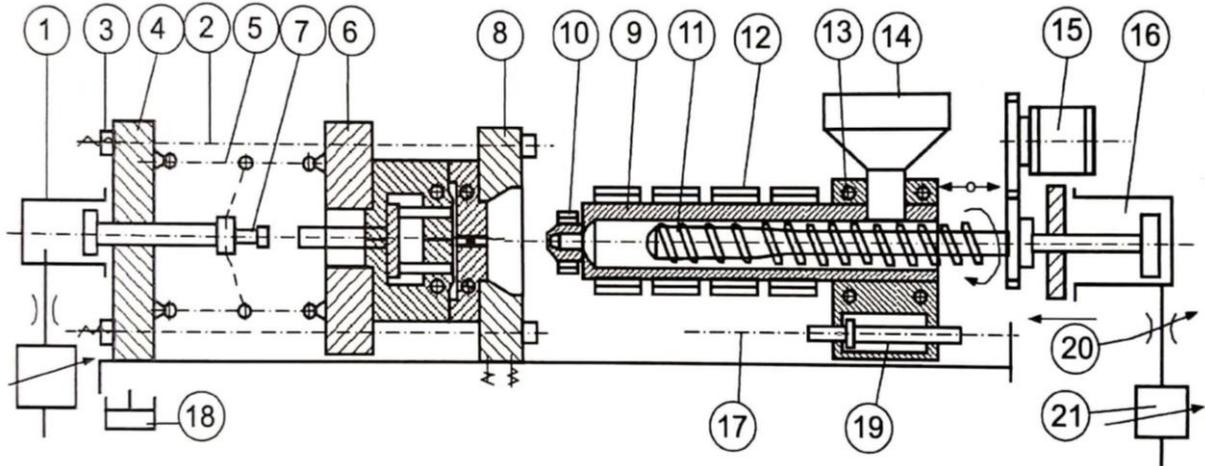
Schematic of a screw injection molding machine with basic components: 1 – drive cylinder for the table, 2 – guiding columns for the table, 3 – height adjustment nuts for the mold, 4 – rear fixed table, 5 – toggle lever system, 6 – moving table, 7 – injection machine buffer, 8 – front fixed table, 9 – injection cylinder, 10 – injection nozzle, 11 – screw, 12 – heaters, 13 – cooling system for the cylinder's feed zone, 14 – feed hopper, 15 – motor for screw rotation, 16 – screw shifting cylinder, 17 – guiding rails for the injection unit, 18 – hydraulic oil tank, 19 – cylinder shifting drive, 20 – throttle, 21 – pressure regulator for the hydraulic system [1].
